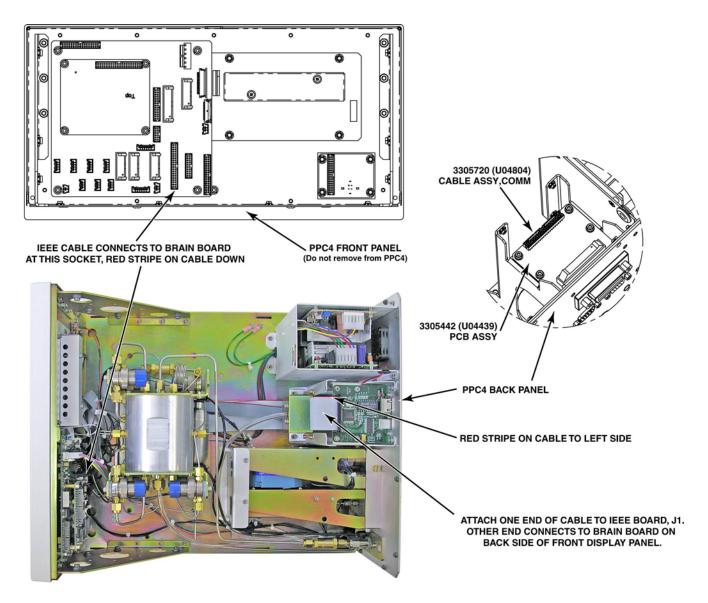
Installing the IEEE Circuit Board and Connector Assemblies
